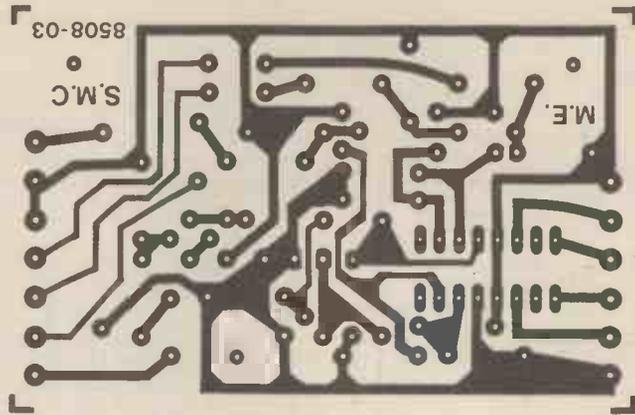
P.c.b. design for the Stepper Motor Interface.
